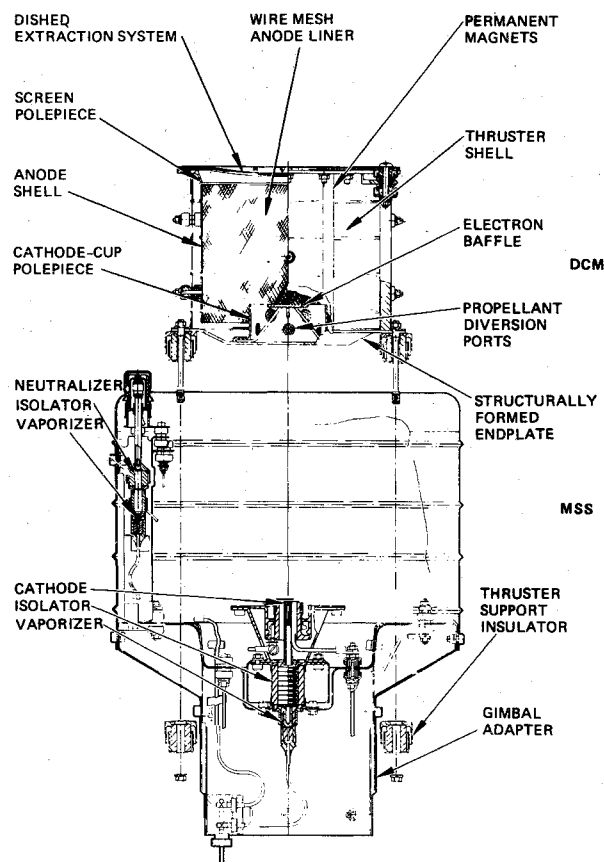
Attachment of discharge-chamber module (DCM) to module support system (MSS).
